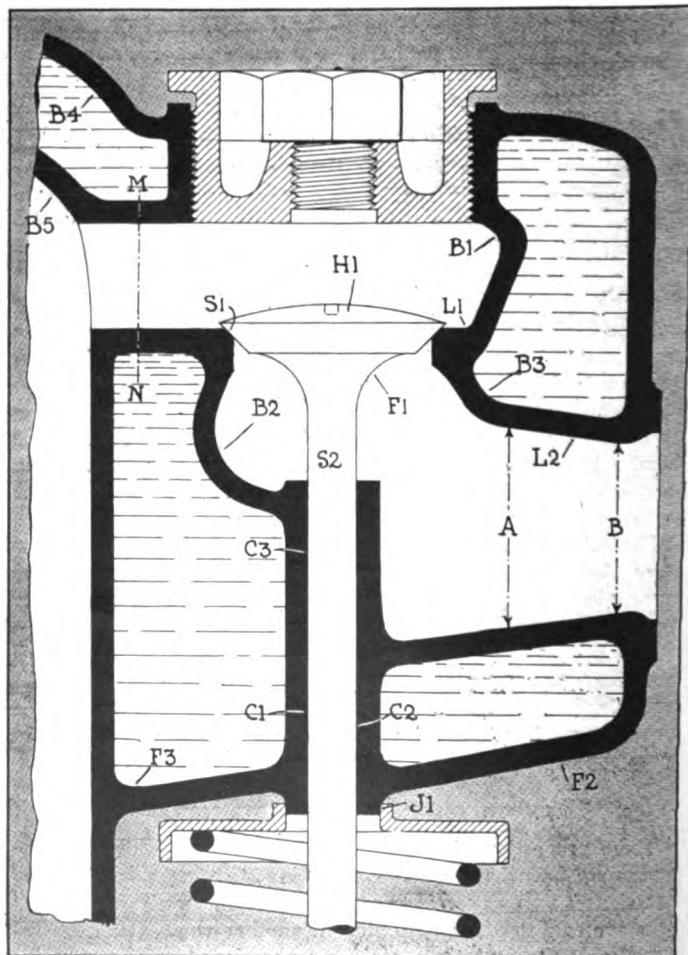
Section of a poppet-valve type of cylinder through the exhaust-valve chamber, showing (slightly exaggerated) bulging and flaring walls, and a "choke" in the exhaust port
